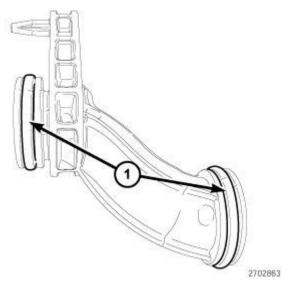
IDENTIFYING O-RING SEALS Courtesy of CHRYSLER LLC
